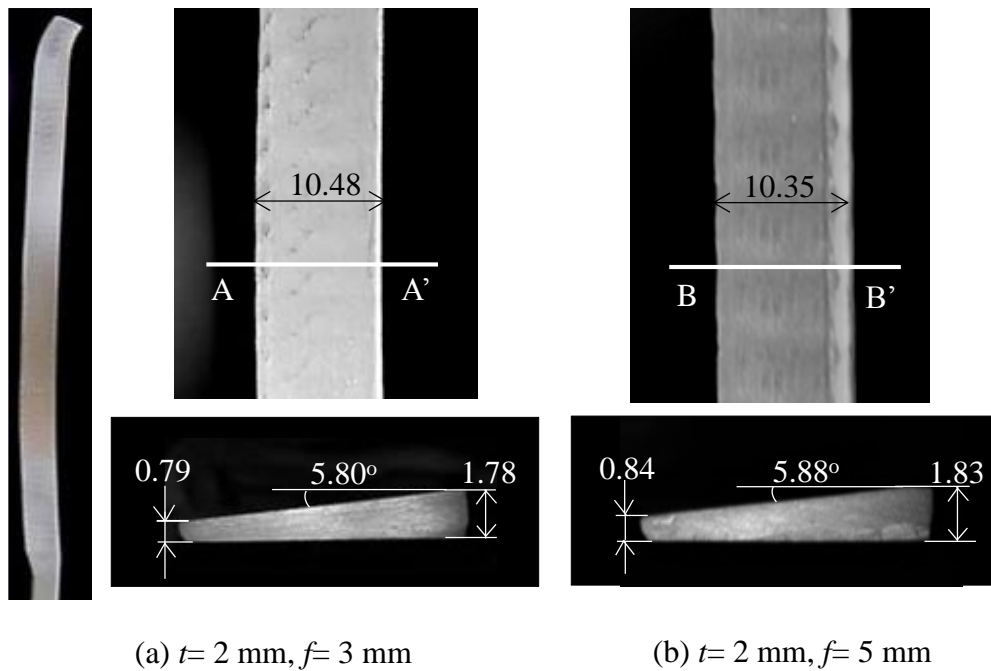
Forged sheets having inclined cross-section with exit guide and tapered punch.
